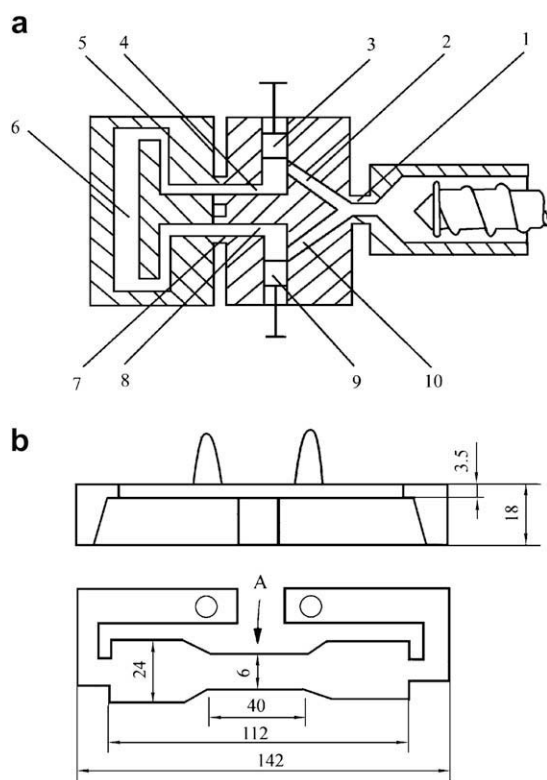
(a) Schematic representation of dynamic packing injection molding (1) nozzle, (2) sprue A, (3) piston A, (4) runner A, (5) connector, (6) specimen, (7) connector, (8) runner B, (9) piston B, (10) sprue B. (b) Sketch of mechanical test specimen dimensions according to ASTM638M standard.
